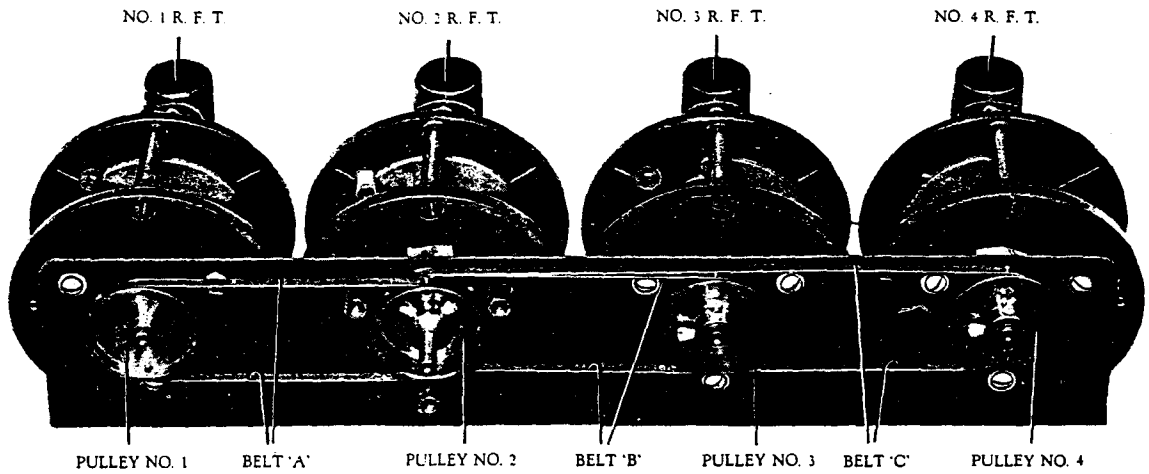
FRONT VIEW OF MODEL 32 SUB-PANEL ASSEMBLY. The same arrangement of pulleys and belts is used on Models 33, 36 and 49, except that the dial-condenser pulley is usually placed with the hollow side toward the condenser.
